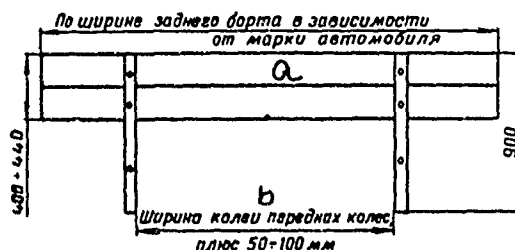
Removable truck rear gate: a - width of rear gate depending on vehicle type; b - width of front wheel track, +50 ± 100 mm.
